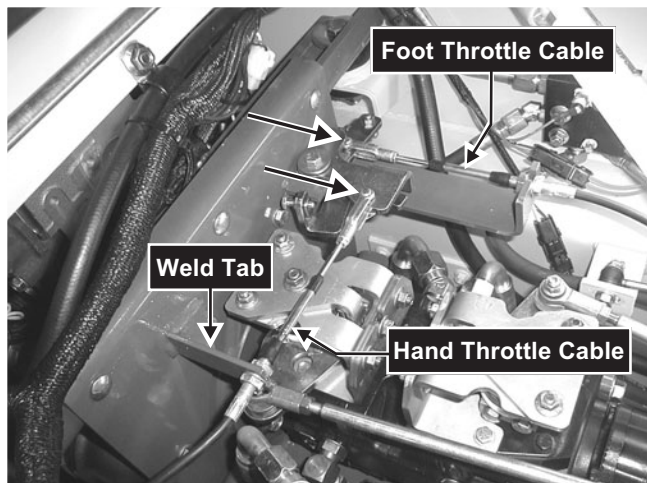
Locations to remove hand throttle cable and foot throttle cable from pivots.
